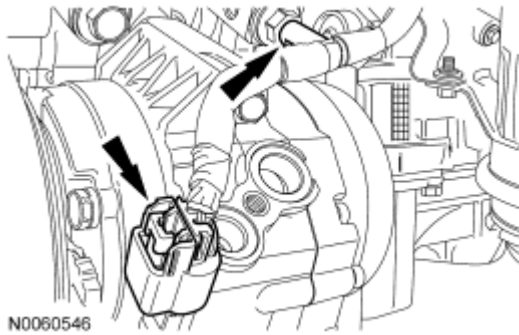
Identifying A/C Compressor Electrical Connector & Wiring Harness Retainer
